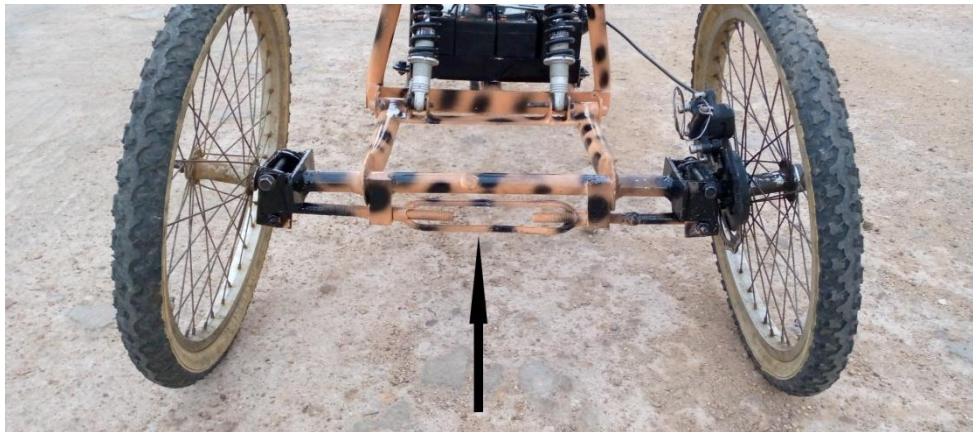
Plate XIX: Wheel camber adjustment mechanism, June, 2021
